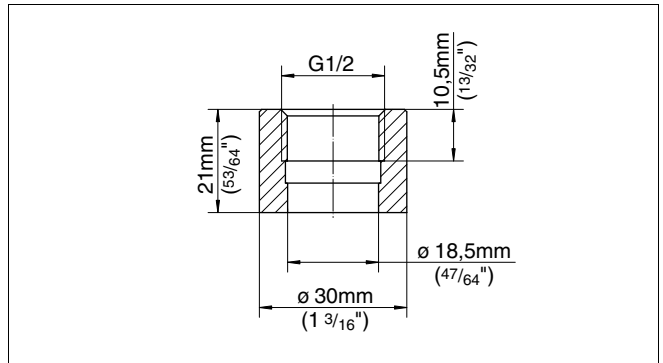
Dimensions welded socket G½ A acc. to ISO 228-1
